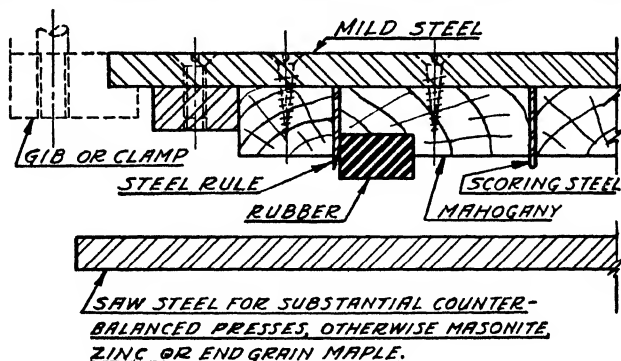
Steel rule cutting and scoring dies are inexpensive and easy to slip into place on the press slide.
